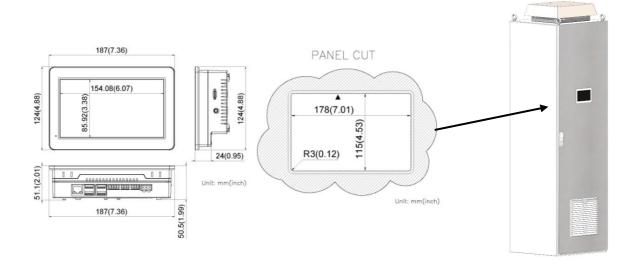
Example of installation of the HMI panel on a cabinet door (dimensions in mm)
